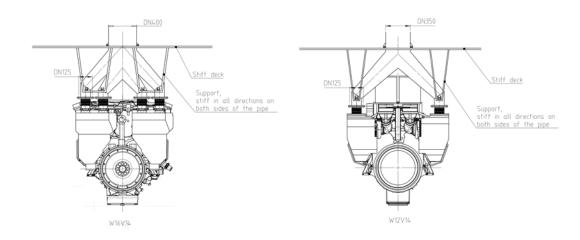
Exhaust pipe connections, W16V14 (DAAF508138A)
